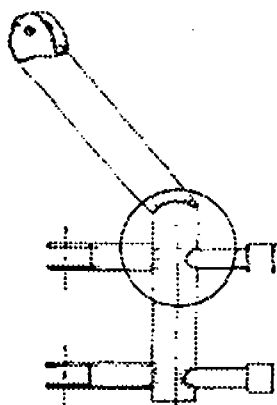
Particularly the welded parts of the lever in the fuselage need to be inspected carefully.
